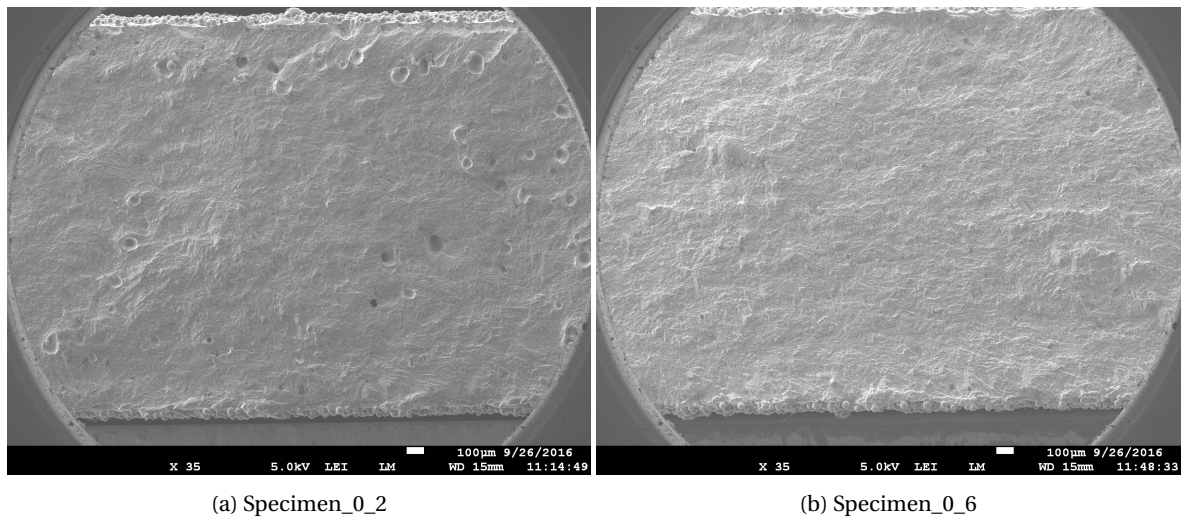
Fracture surface - 0 degrees build direction
